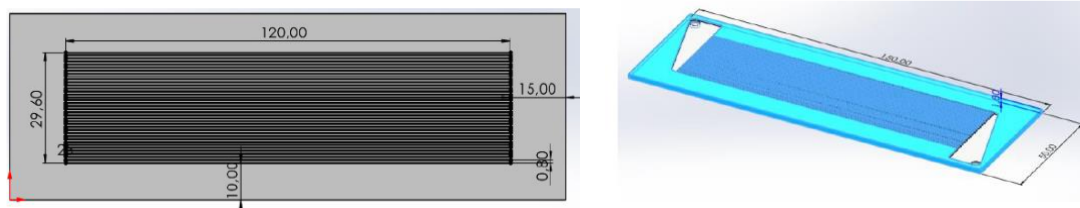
Schematic of the microchannel based heat sink, with main dimensions.
